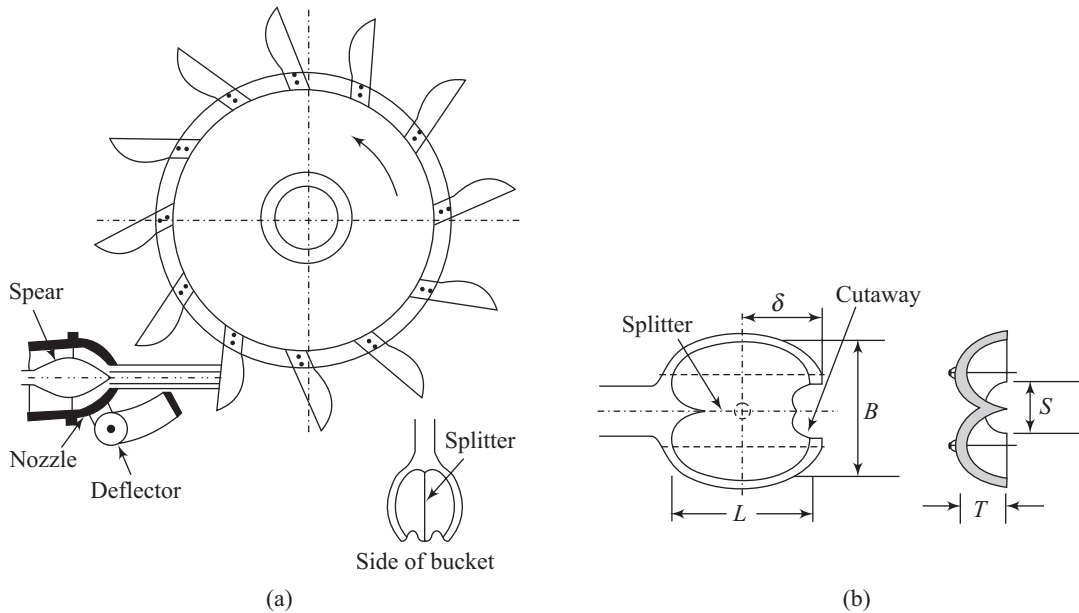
Runner Assembly of a Pelton Wheel with Buckets
